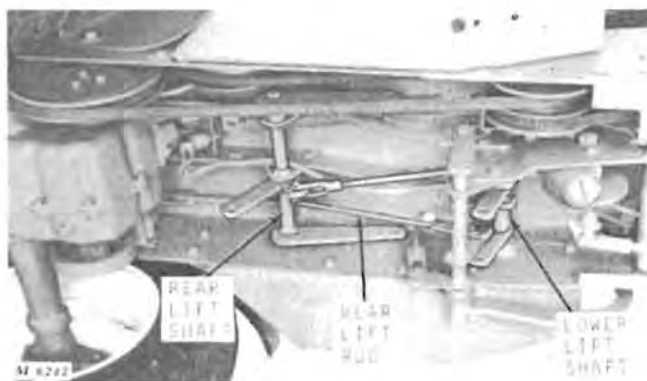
Bottom View - 110 Tractors ( 3551-15000 )
